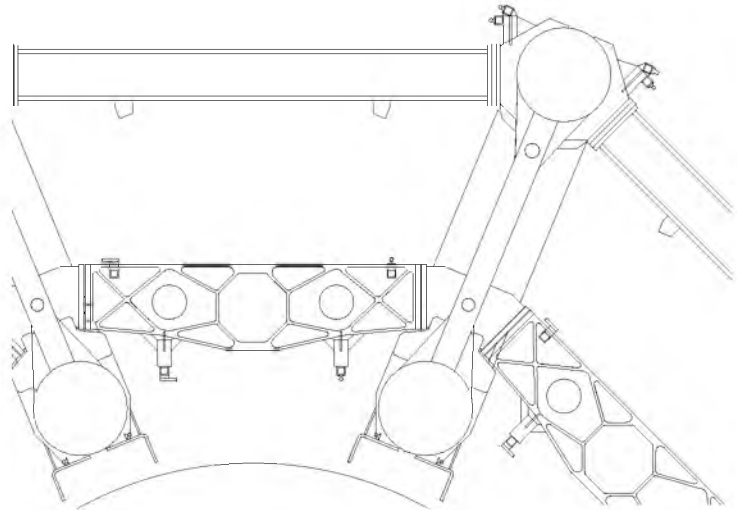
Voussoirs (at the inside) and struts (at the outside) keeping each barrel cryostat in position.
